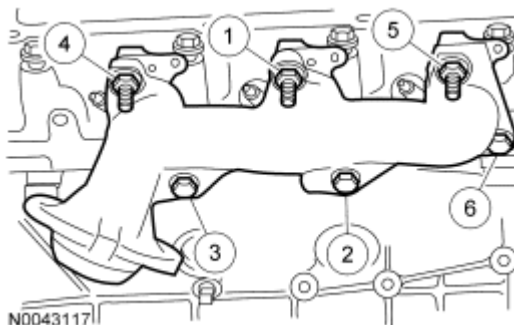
Identifying Tightening Sequence Of Exhaust Manifold Bolts
